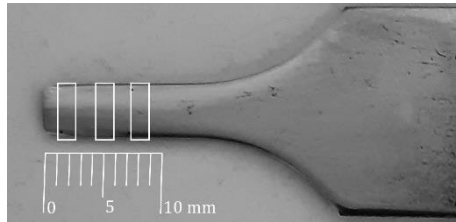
Example of fracture surface projected on the plane perpendicular to the fracture direction.
